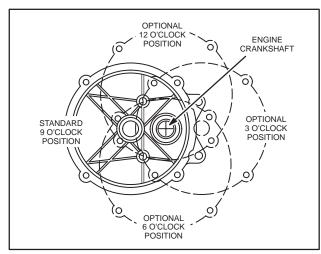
POSITIONING GEAR CASE ASSEMBLY
